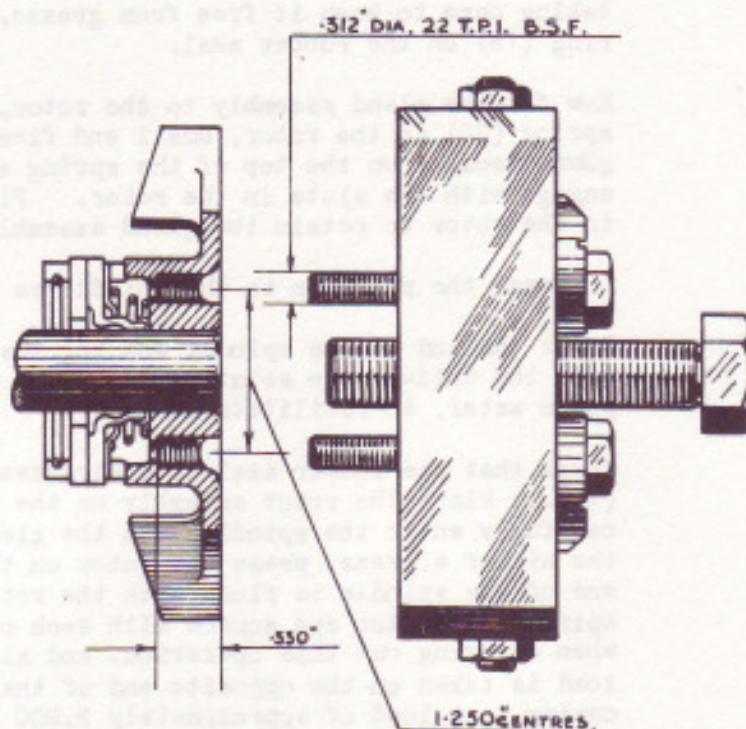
DIMENSIONS FOR DRILLING AND TAPPING EXTRACTOR HOLES IN EARLY TYPE ROTORS AND ALSO VIEW OF EXTRACTOR STD. 505.
